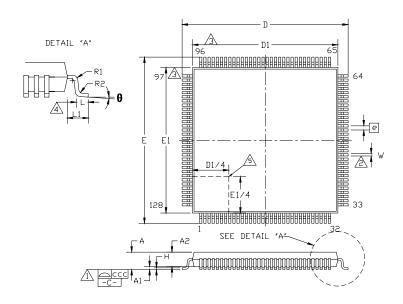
USB2229/USB2230 128-Pin TQFP Package Outline
